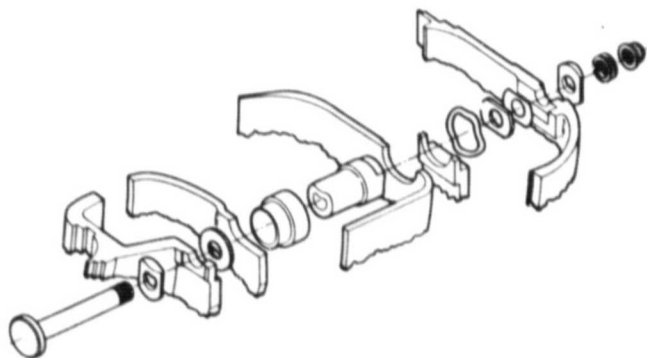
AGT101 Turbine Shroud Support/Alignment System.
